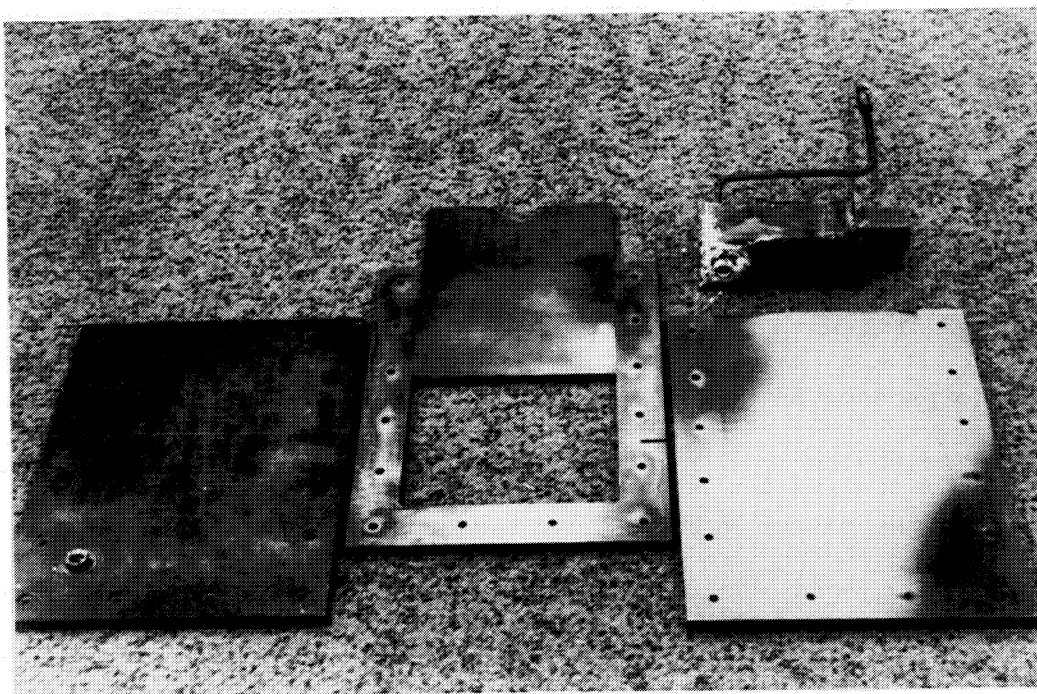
Steel Mold Used to Form the PEEK Thermoplastic Specimen Blanks.
